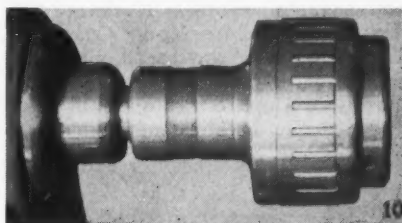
The "bearinizing" tool. With the tool revolving at a speed of 2,000 r.p.m., the rollers strike a series of light hammer blows on the surface of the metal, compressing it.
